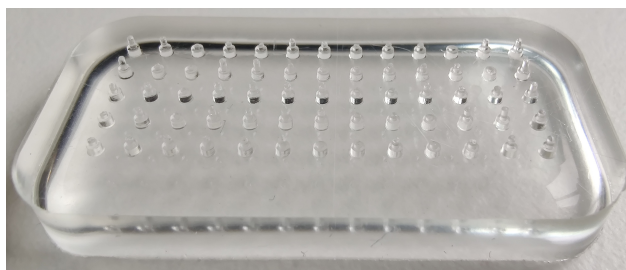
Layer of excess material from the mold with the silicone plugs still attached. They would later be cut free with a scalpel.
